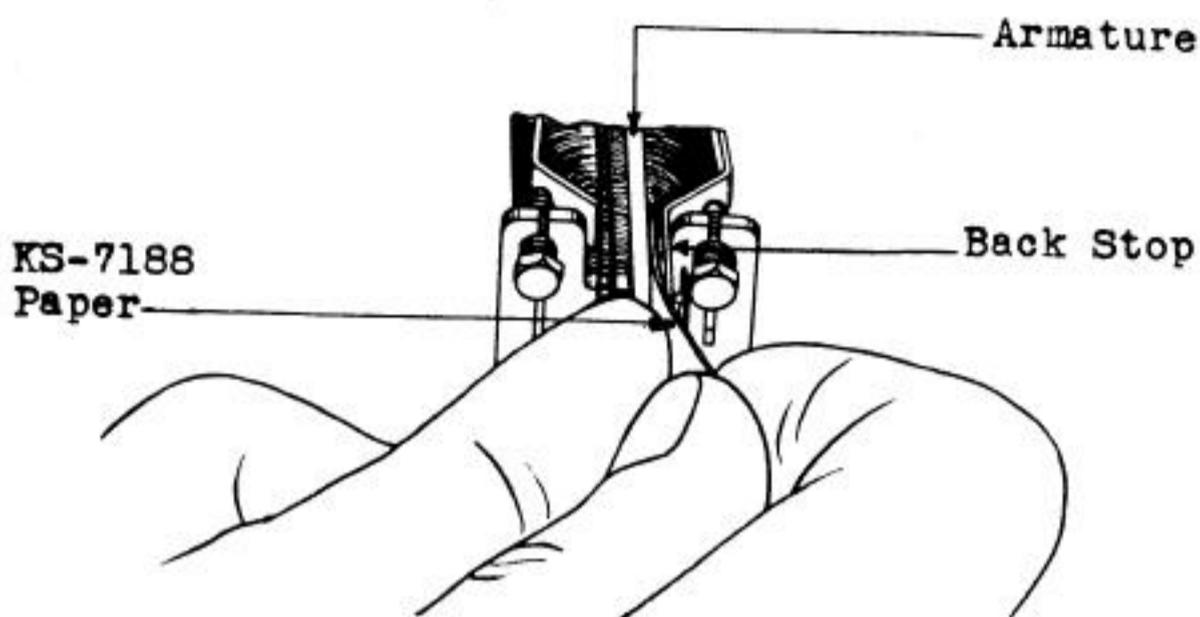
Method of Cleaning Front and Back Stops on B, G and J Type Relays
